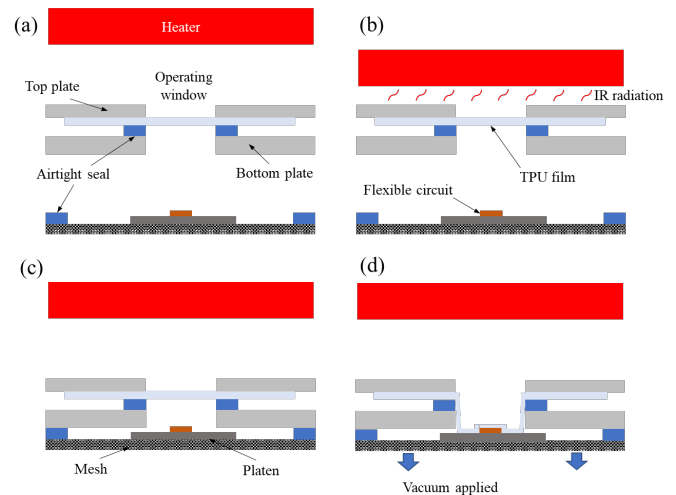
Schematic diagram of vacuum forming process using Formech 450DT for moulding with Platilon U 4201 AU. (a) The heater is at the standby position and the sample is placed on the table below the clamped TPU film under the window; (b) the heater is moved forward to the front end from standby position to heat the TPU material; (c) the heater is moved back to the standby position and mesh and platen are raised towards the softened TPU forming a seal around the mesh; (d) vacuum is applied to force the softened material over the circuit.
